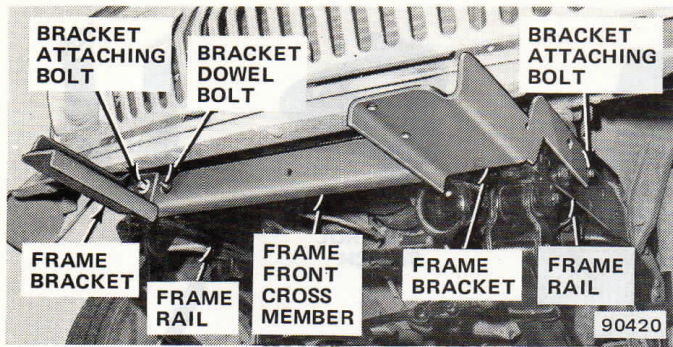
Frame Bracket Installation—1976-78 Models
